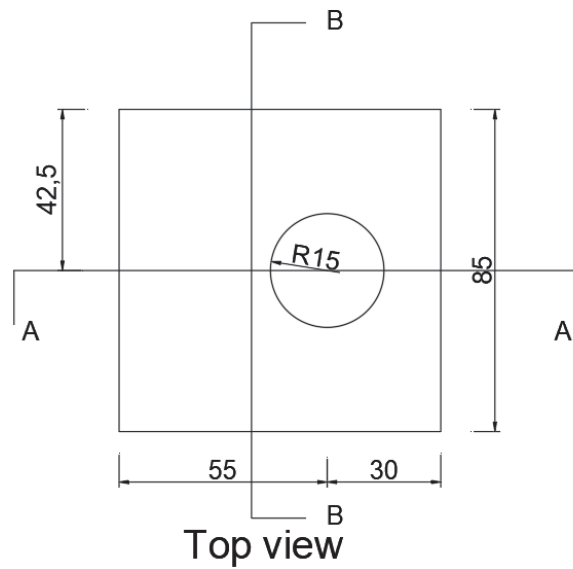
Top view of the mechanical grip system (dimensions are in mm).
